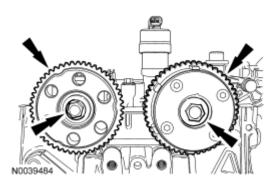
Identifying Special Camshaft Tool (303-465) Courtesy of FORD MOTOR CO.
